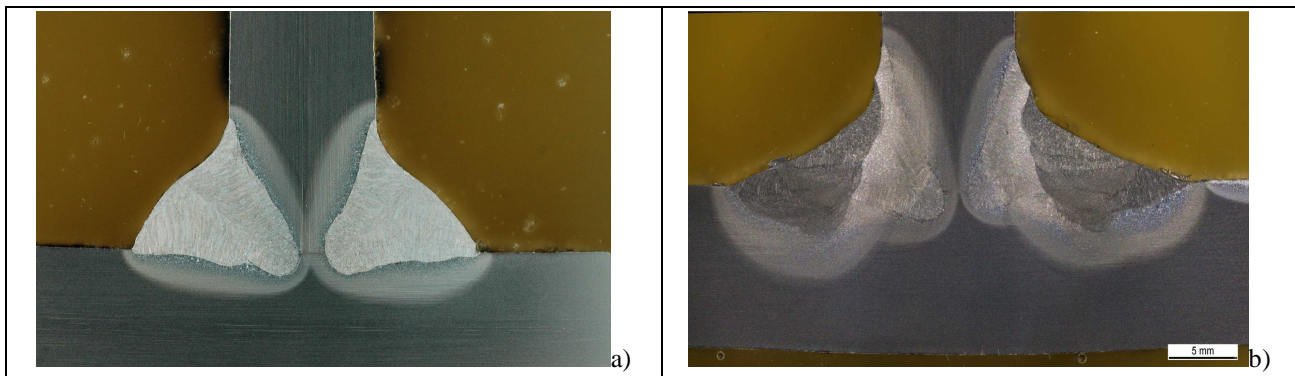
The heat affected zone a) by original weld seam; b) after seam' repair
